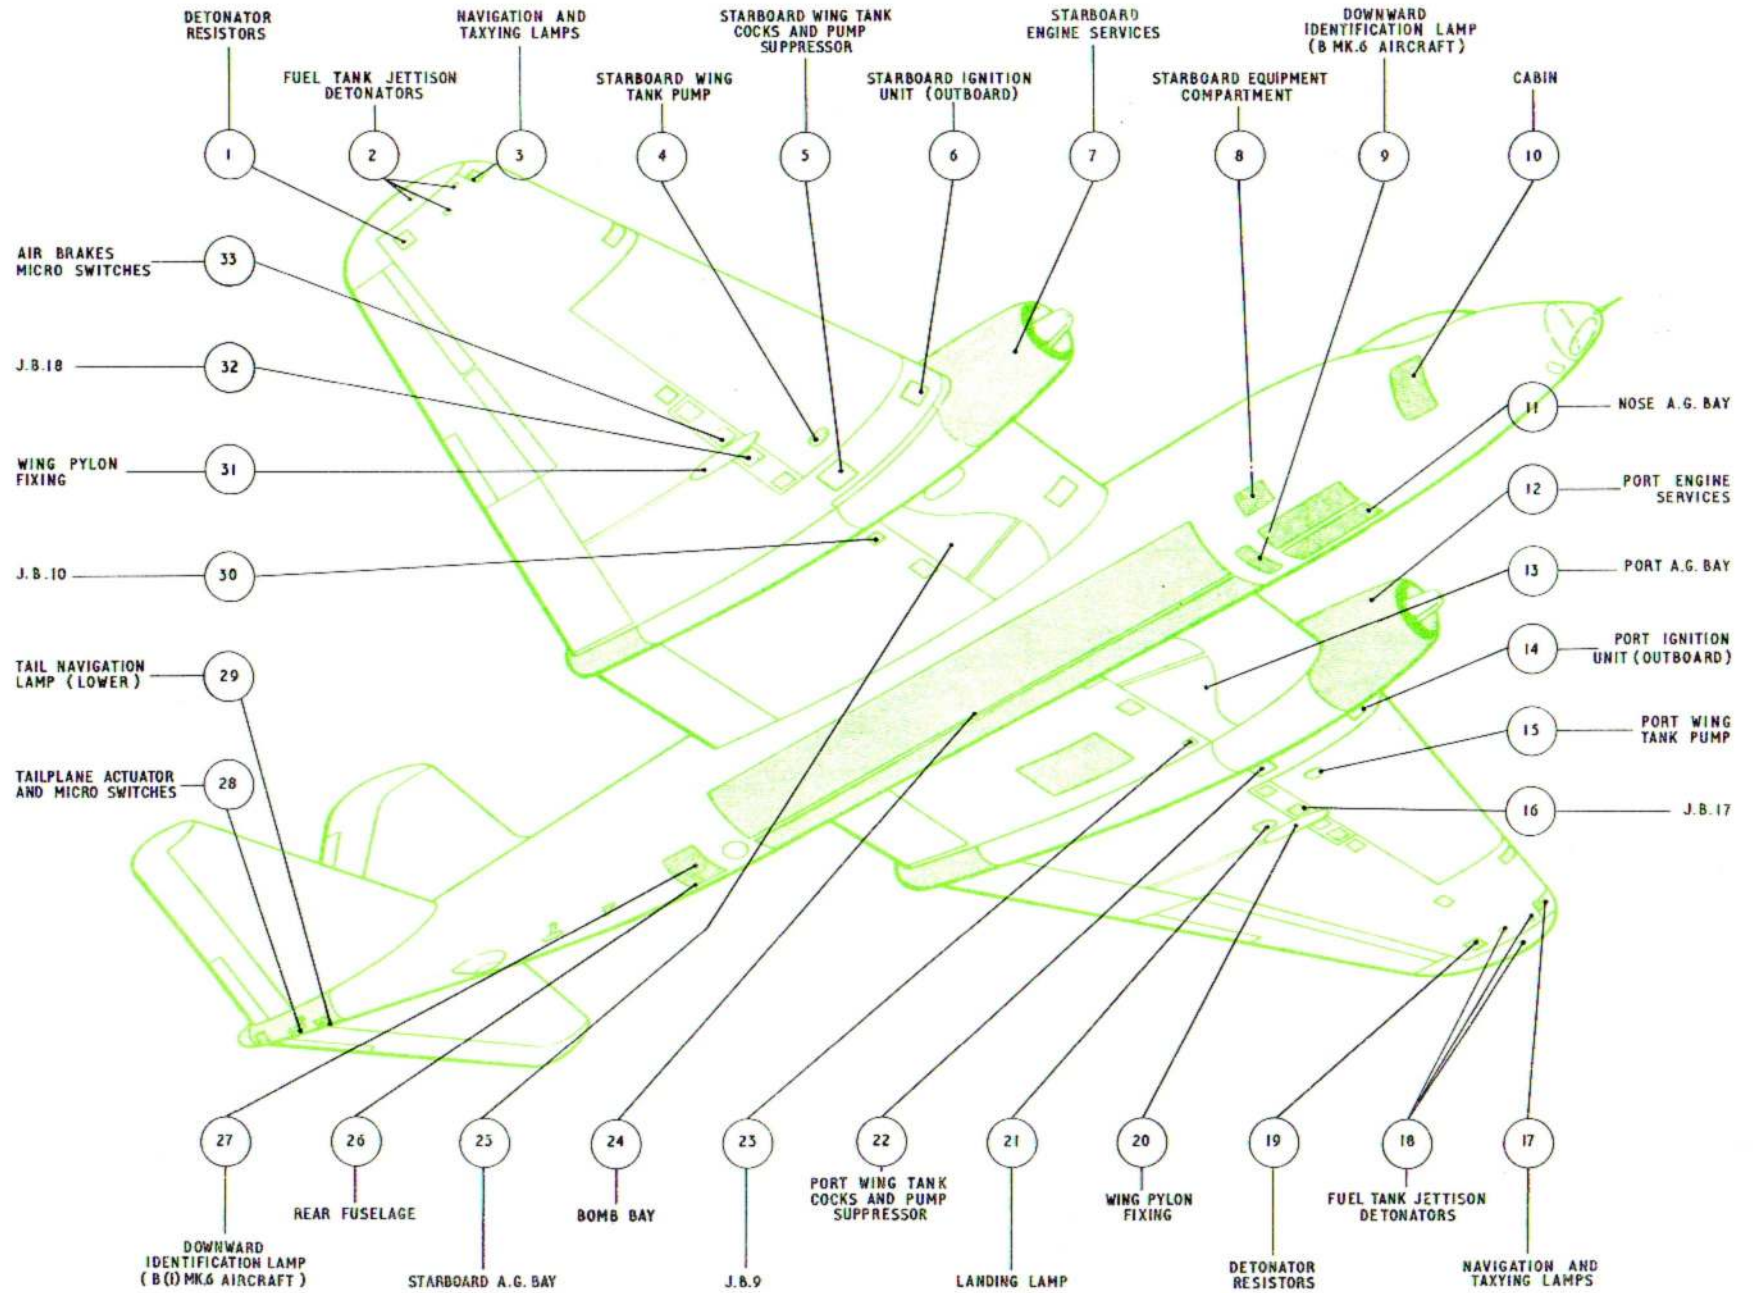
Electrical installation - access panels, lower surface and starboard side
